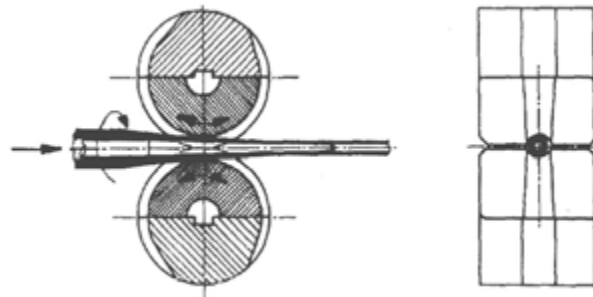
Pilgering: two-roll mill (half ring dies).
